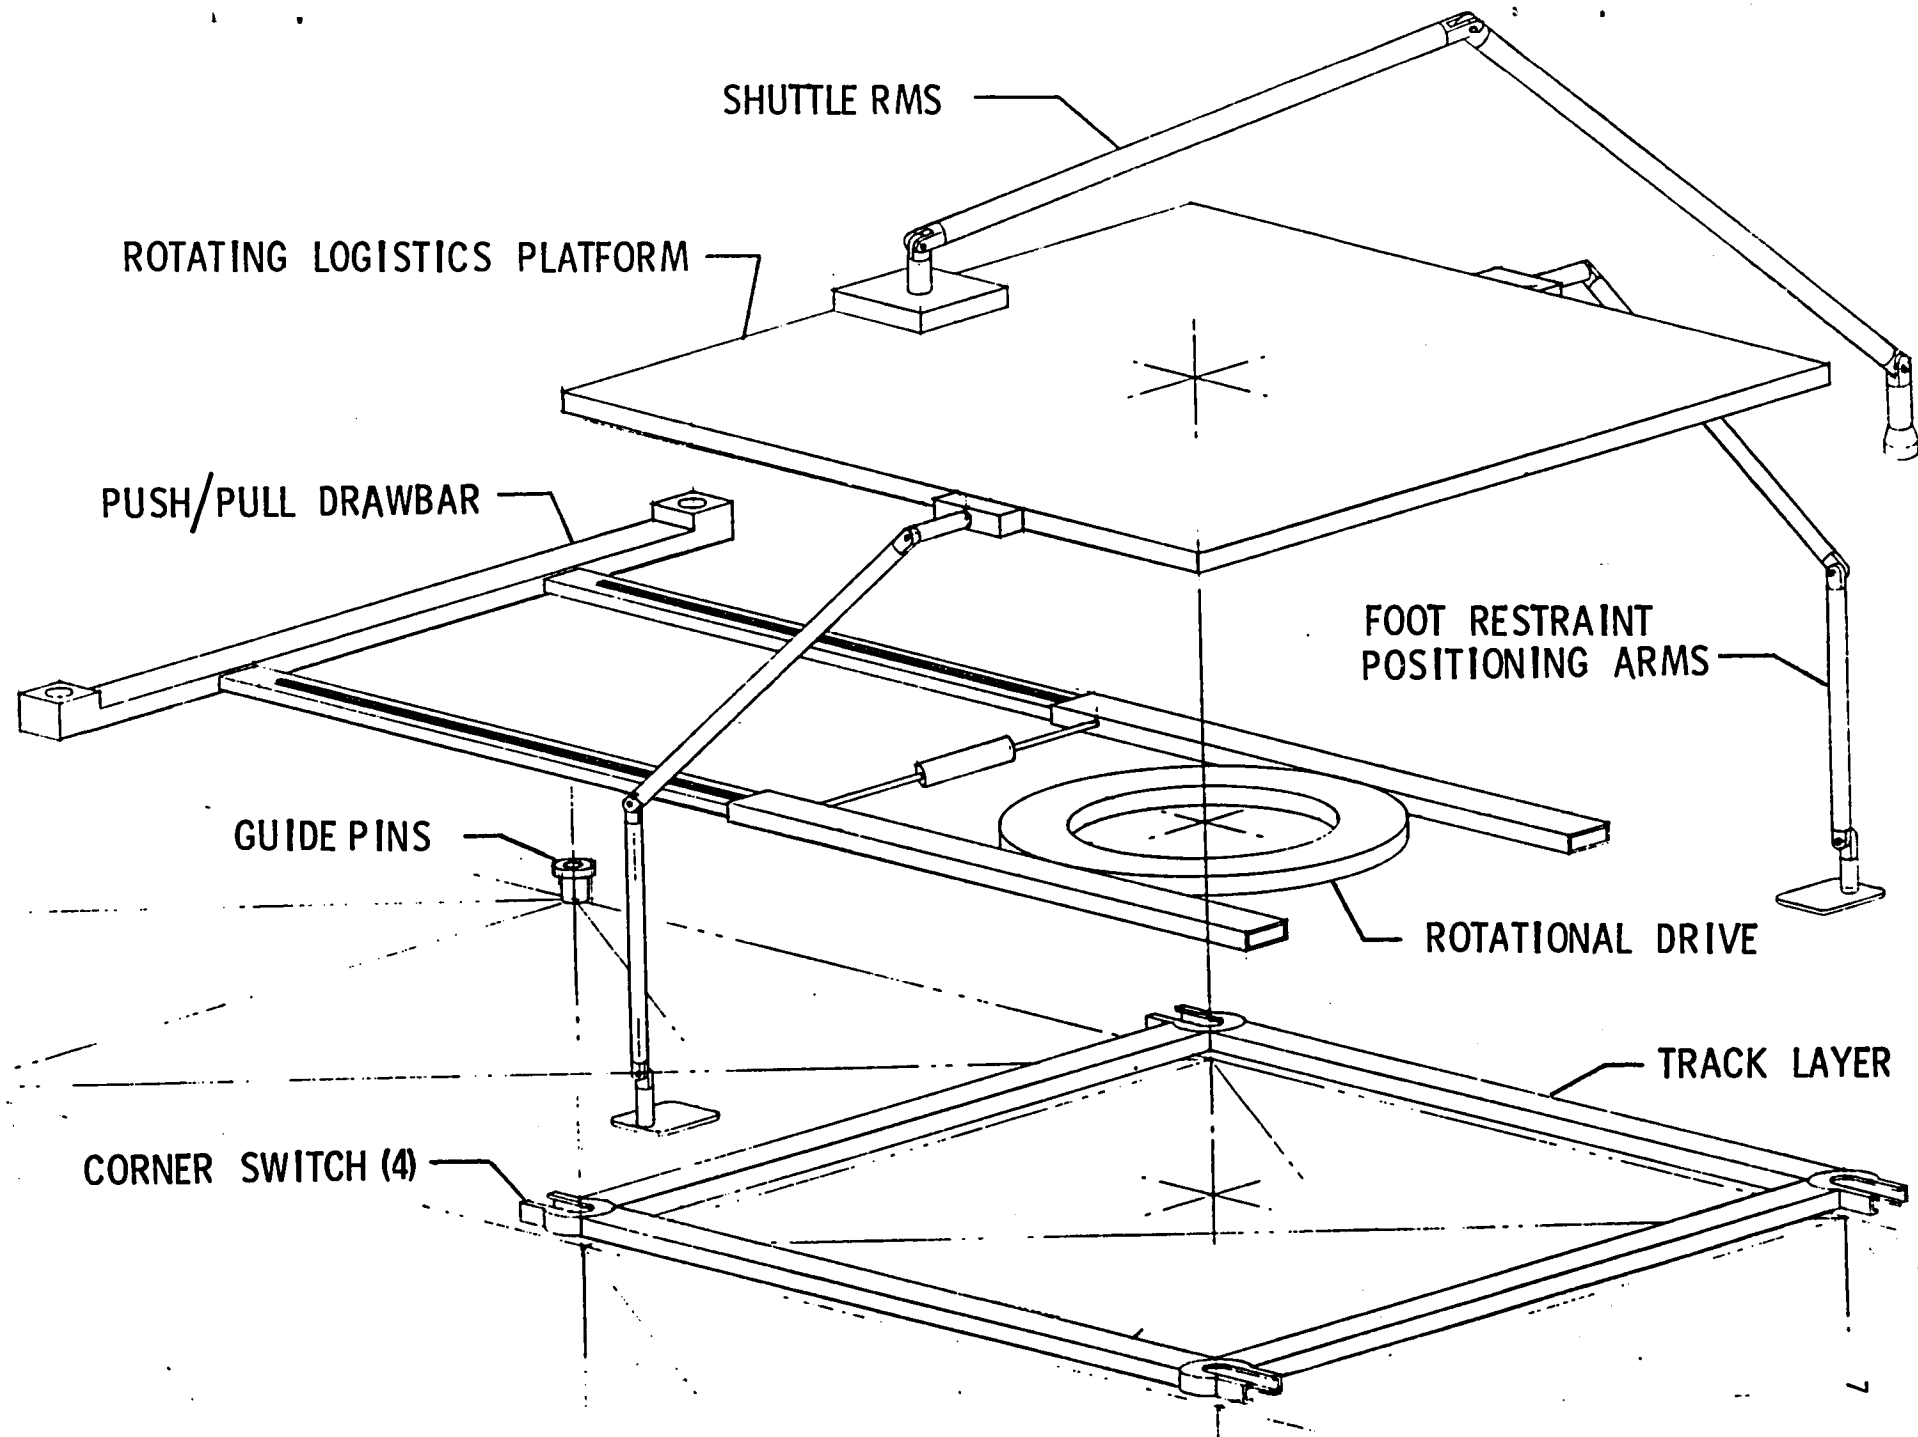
Mobile Remote Manipulator System Elements (Exploded View)
